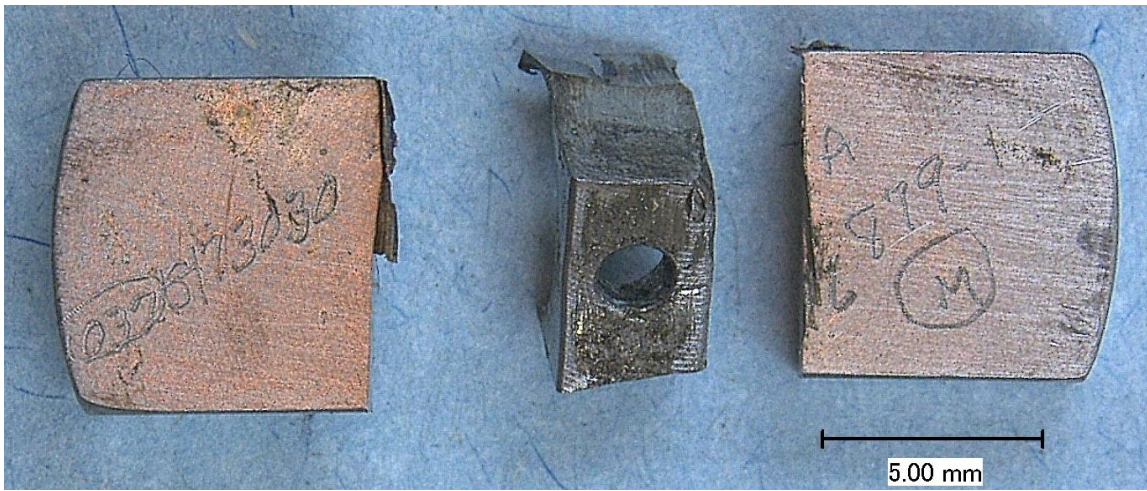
The lever arm, reverse side of Figure 16 (faces towards motor housing).
